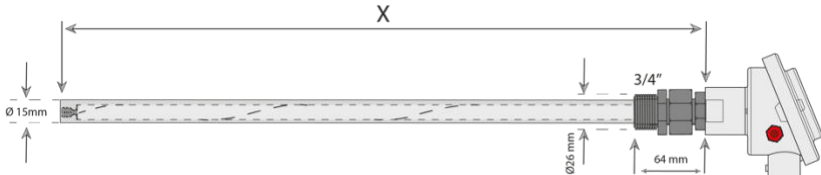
CarboProbe™ HT with 3/4" thread and ceramic sheath
